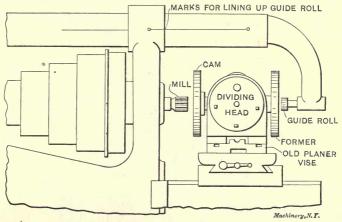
Inexpensive Fixture for Milling Plate Cams to Match a Former
